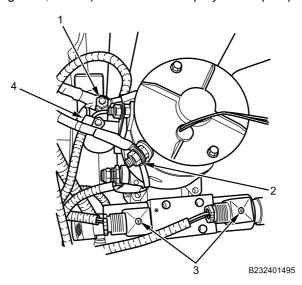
Hydraulic Pump and Valve Assembly Electrical Connections.
